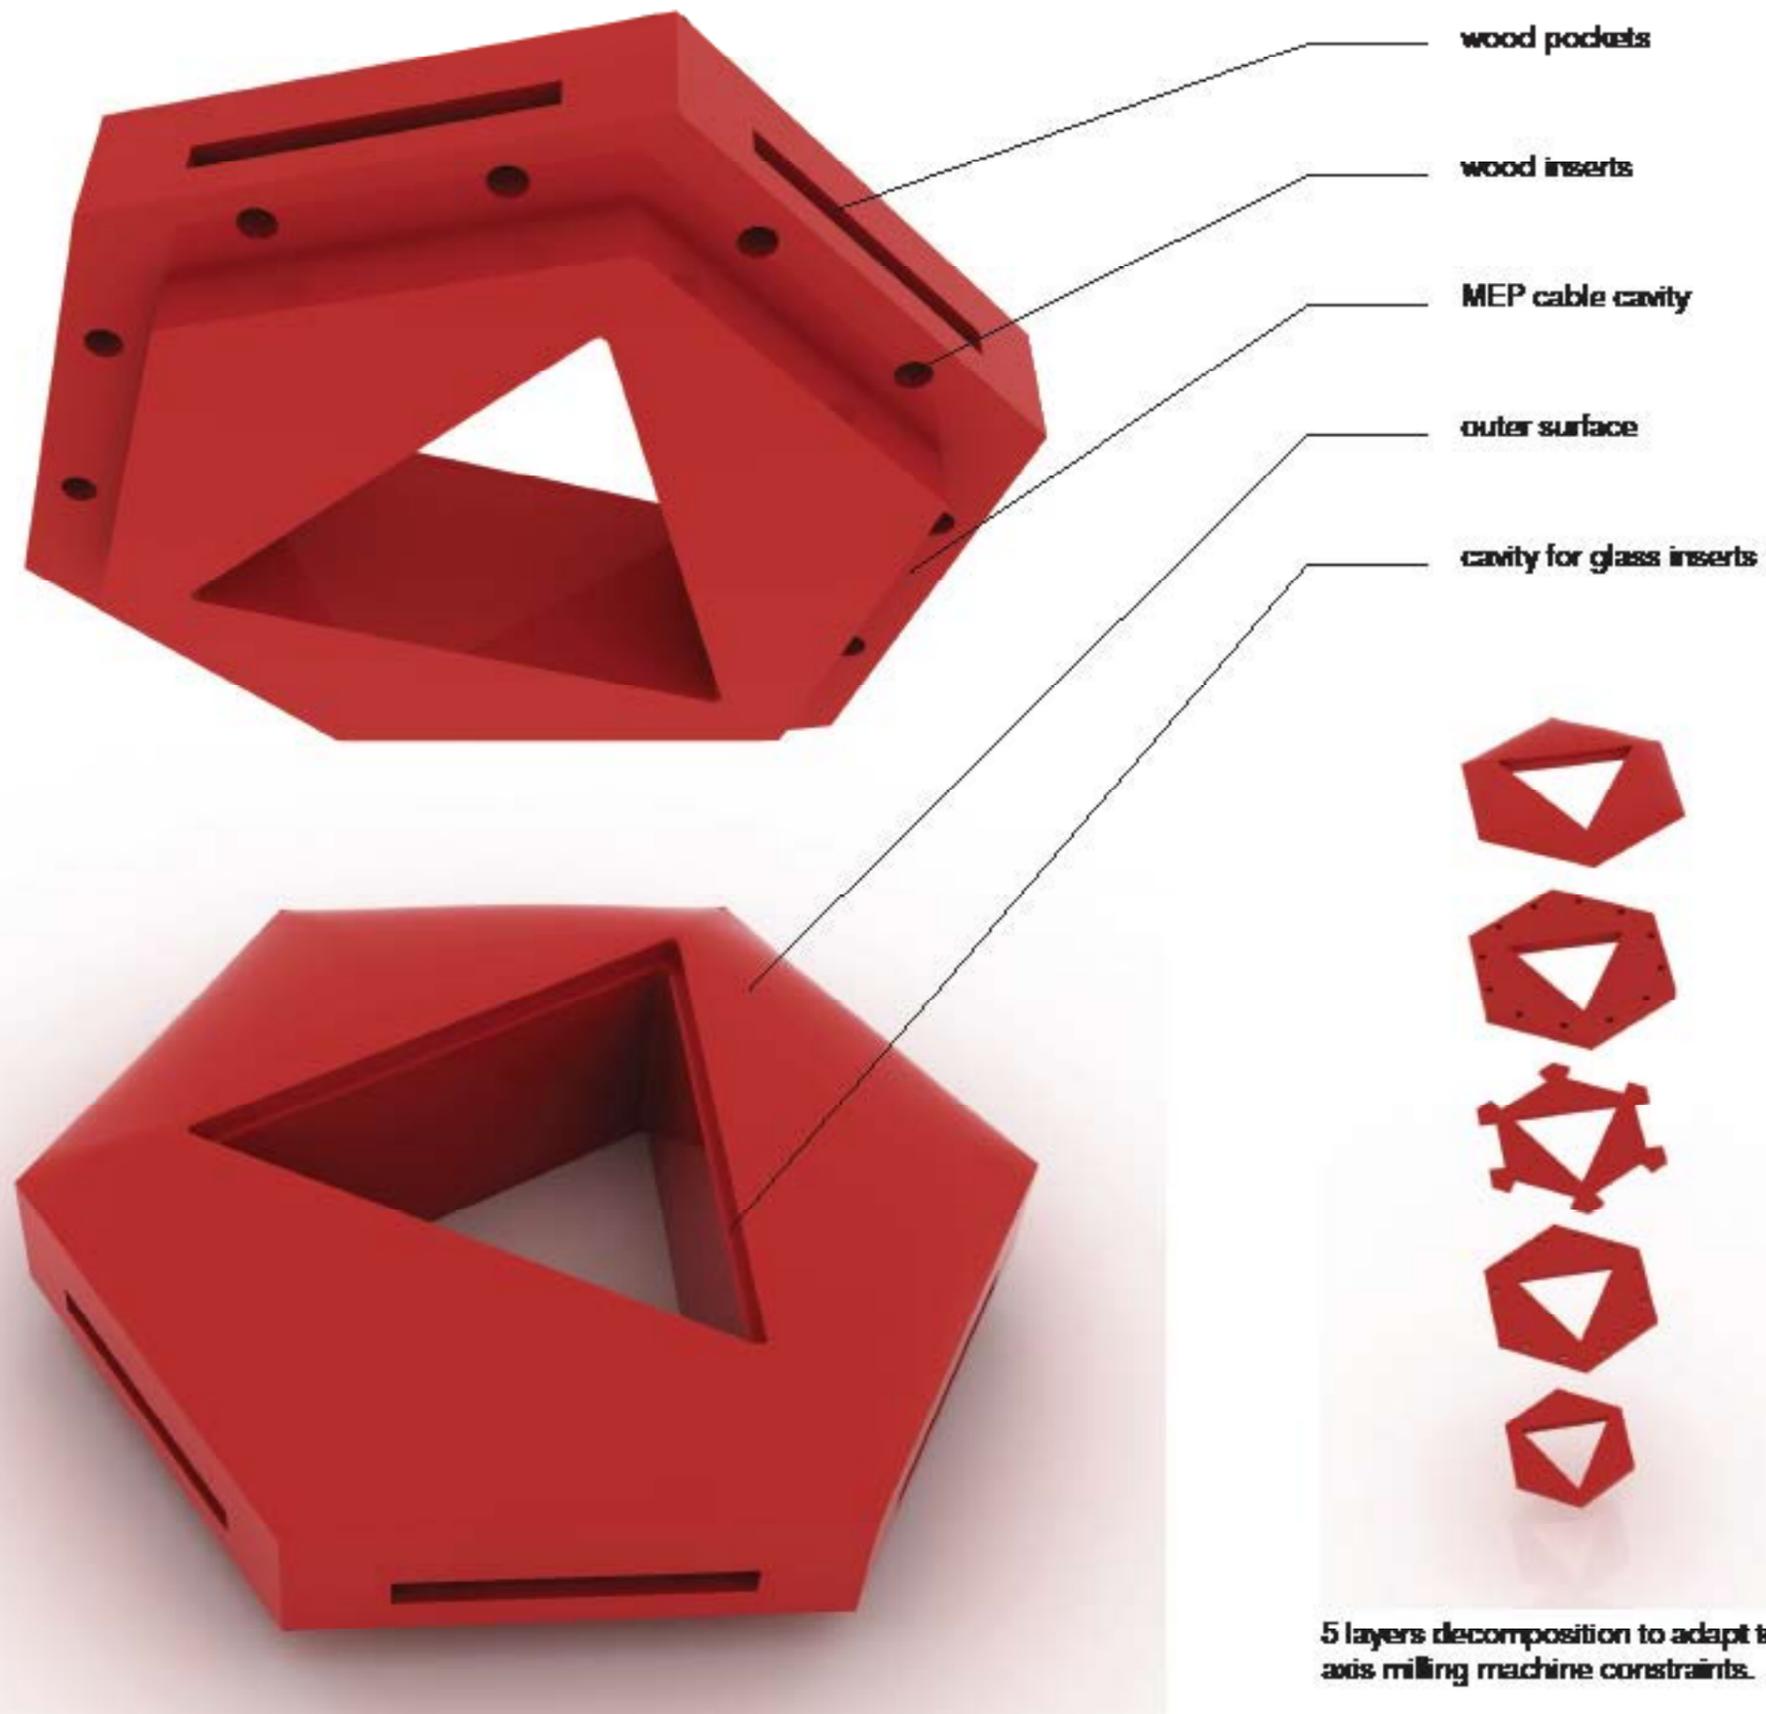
The proposed prototype is to be milled in 5 steps to cope with the constraints of the CNC 3-axis milling machine.
